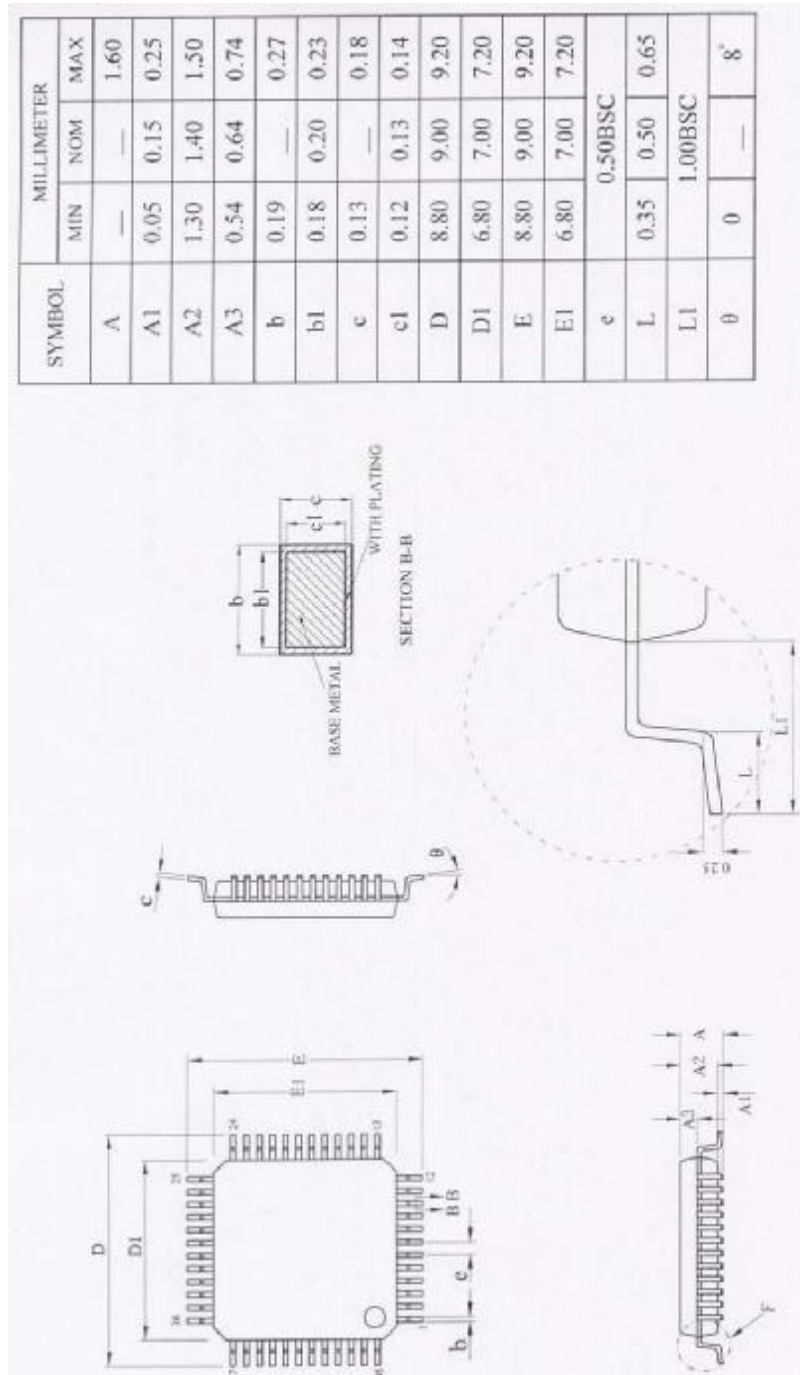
LQFP48-7x7mm Package Dimension Parameter
